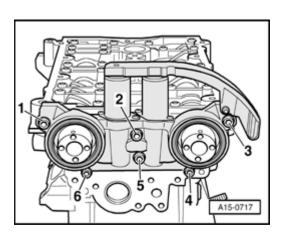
Installing Camshaft Sealing Rings Using T40017 Lever Courtesy of VOLKSWAGEN UNITED STATES, INC.
